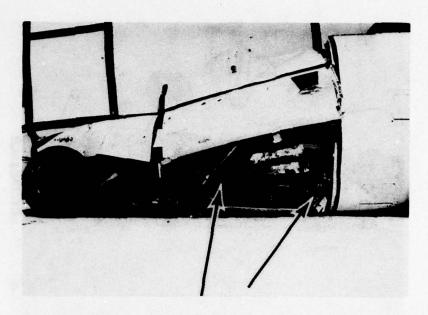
CH-47A Crash Test - Failure of the Aft Landing Gear Support Structure Area.
